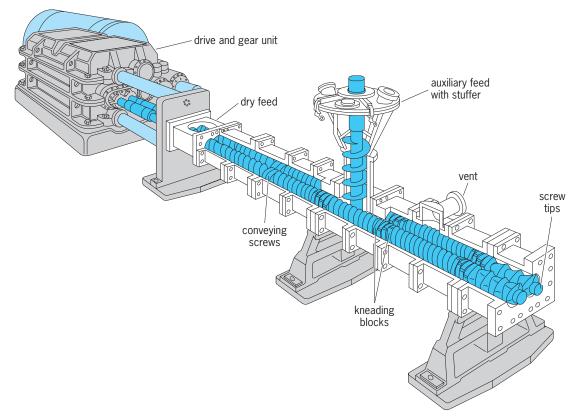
Twin-screw extruder with cutaway exposing screw configuration. (Werner and Pfleiderer Co., Ramsey, New Jersey)
